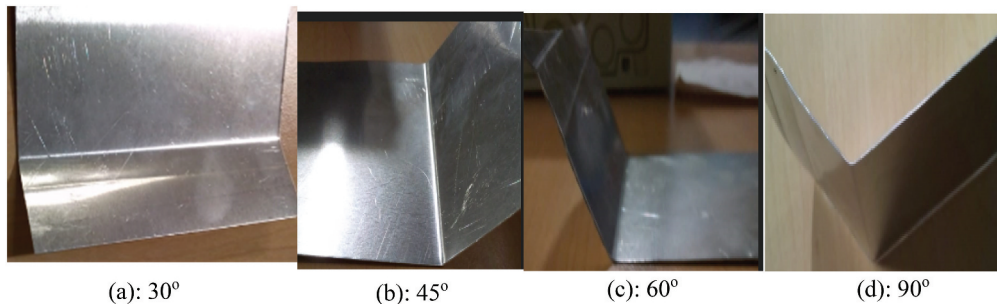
Cutting operation of aluminium sheet fig. 3b: Bending operation of the aluminium sheet.
